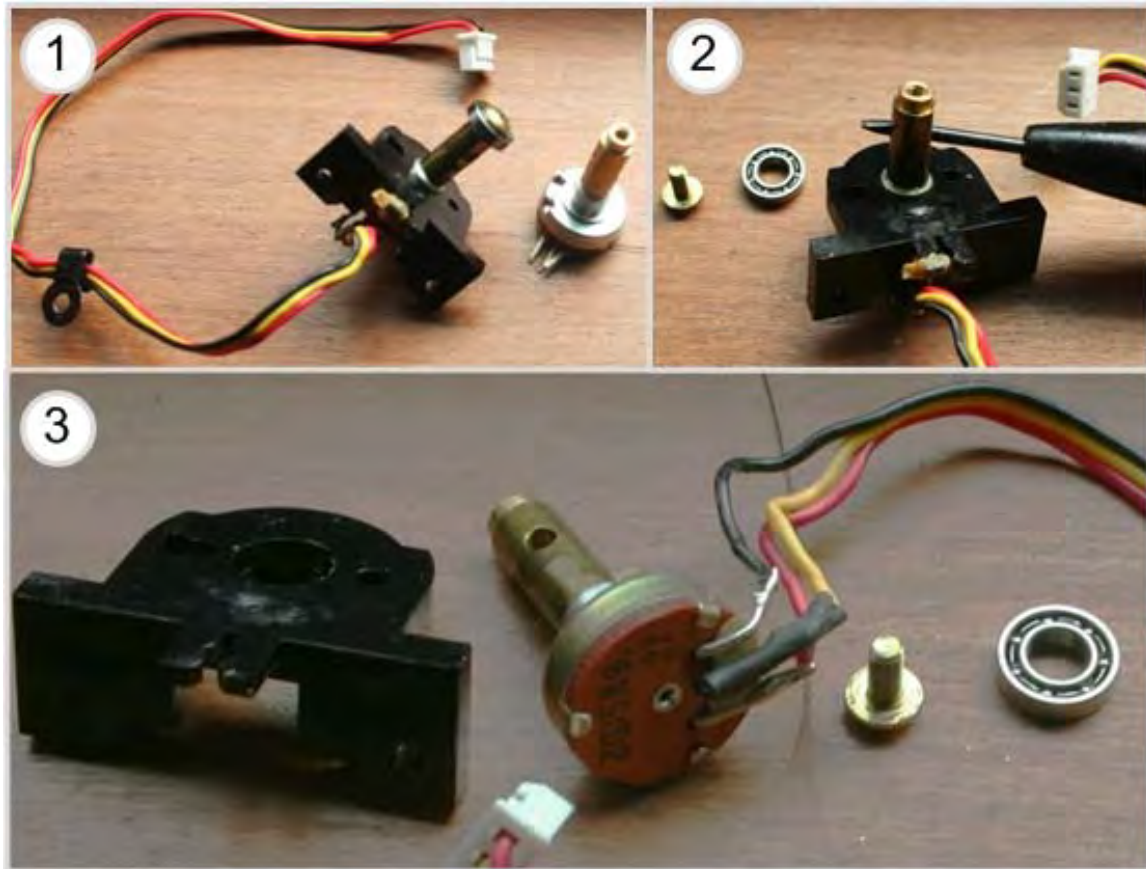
Unscrew the ball bearing from the horizontal axis POT
